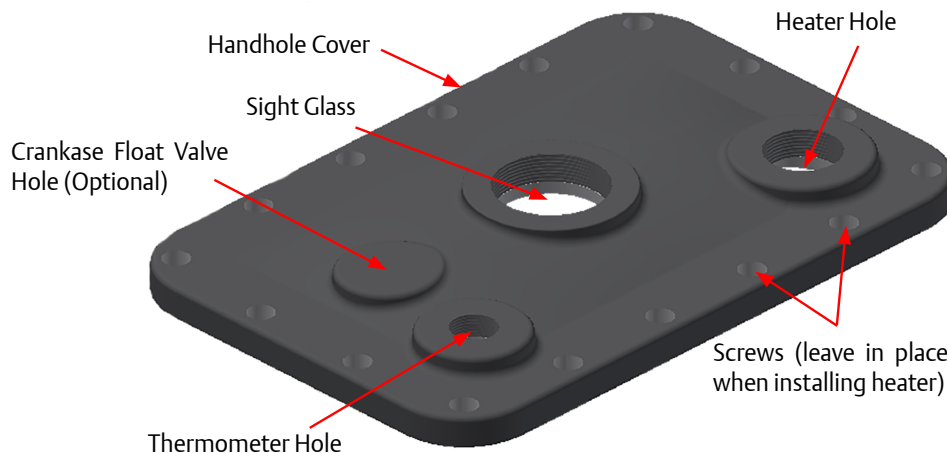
Typical Crankcase Handhole Cover - 400 VMC Compressors
